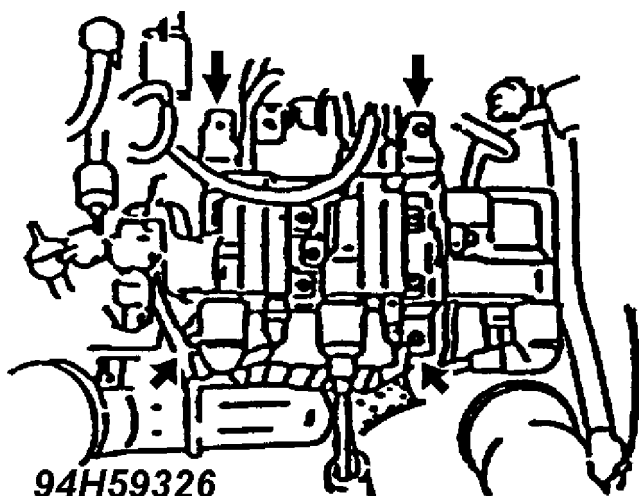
Four Nuts Holding the Ignition Coil Assembly
